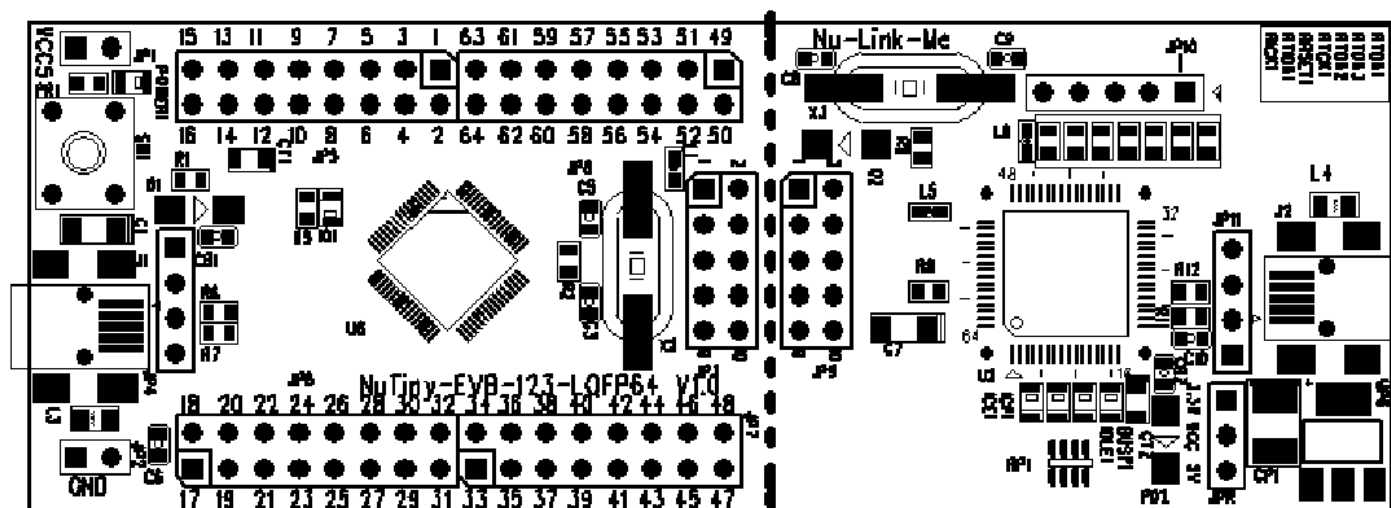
NuTiny-SDK-NUC123 PCB Placement
